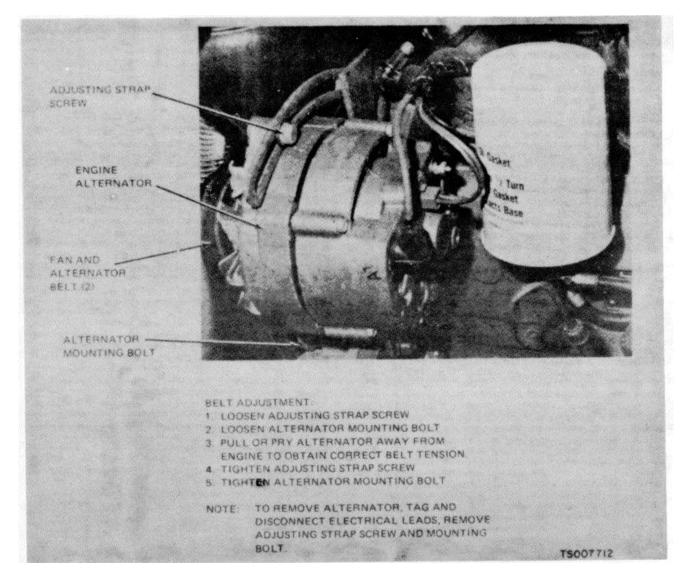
Fan and Alternator Belt Adjustment and Replacement, and Alternator Replacement
